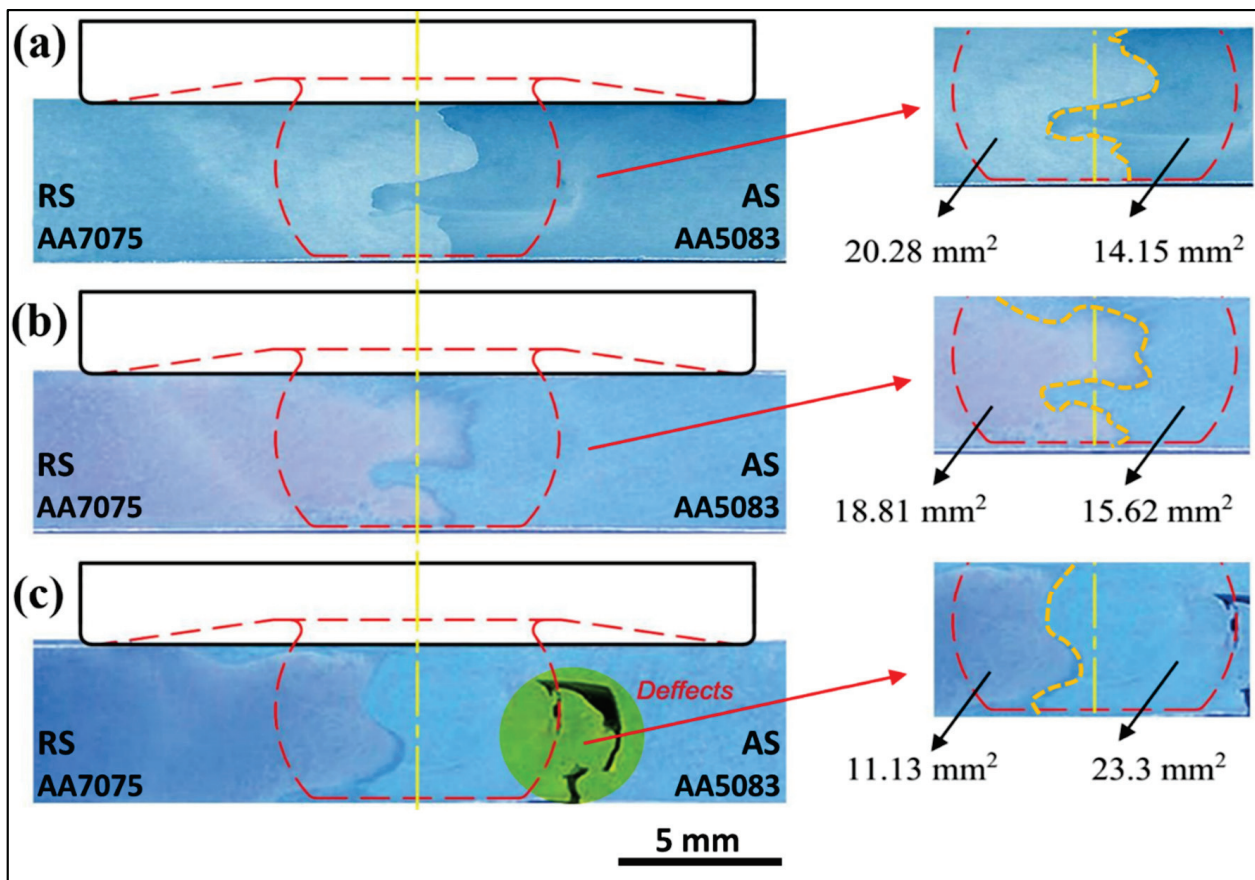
Macrostructure of dissimilar FSWed joints AA7075 and AA5083 at different welding speeds: (a) 25 mm/min, (b) 50 mm/min, and (c) 75 mm/min.
